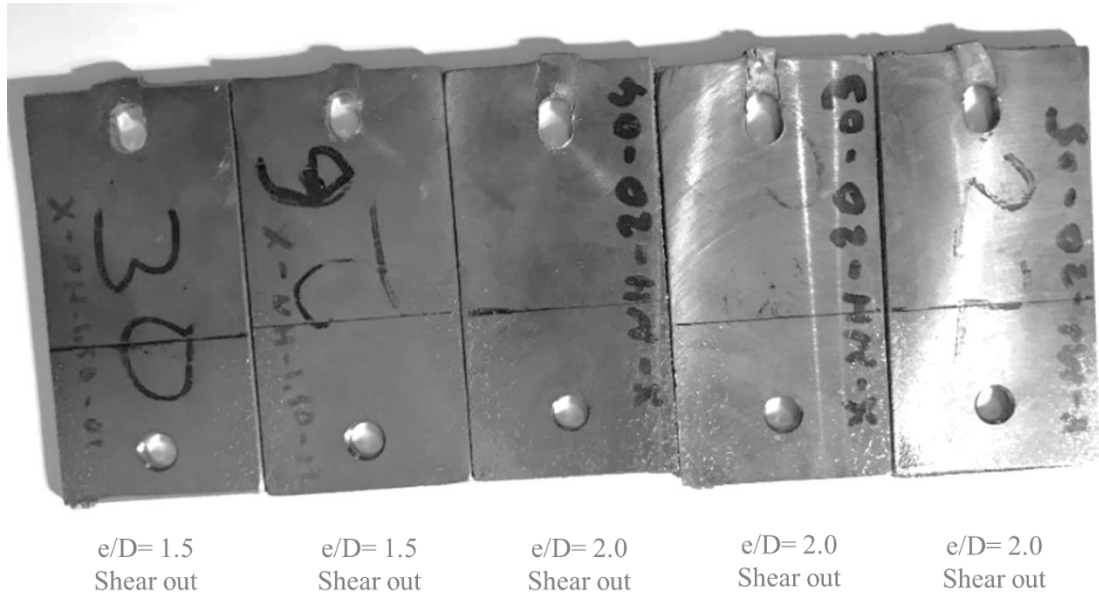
As built ST build direction pin-bearing test specimens after fracture.
